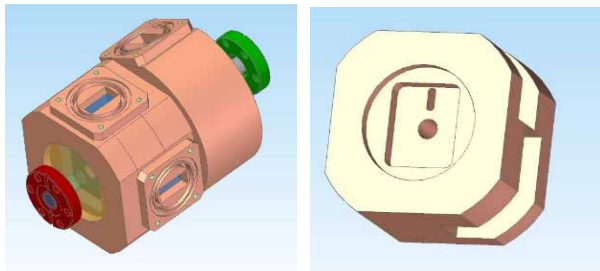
View of the brazed assembly (left), and a detail of the machining of a rectangular cavity with a single waveguide coupling slot.
